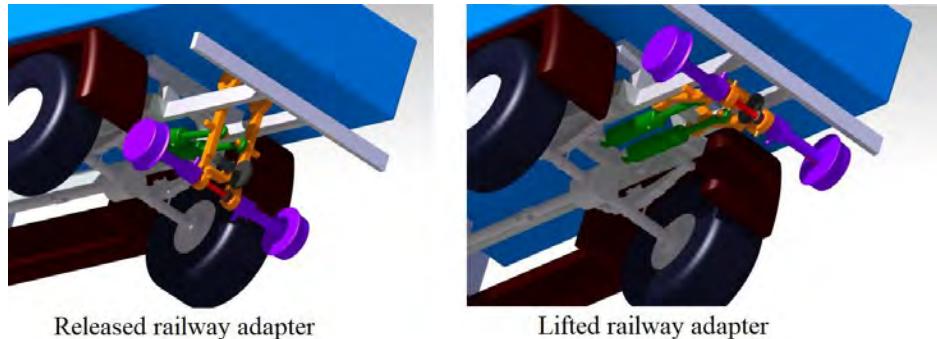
A view of the vehicle with the designed steel-steel adapter in the rear part of the vehicle
